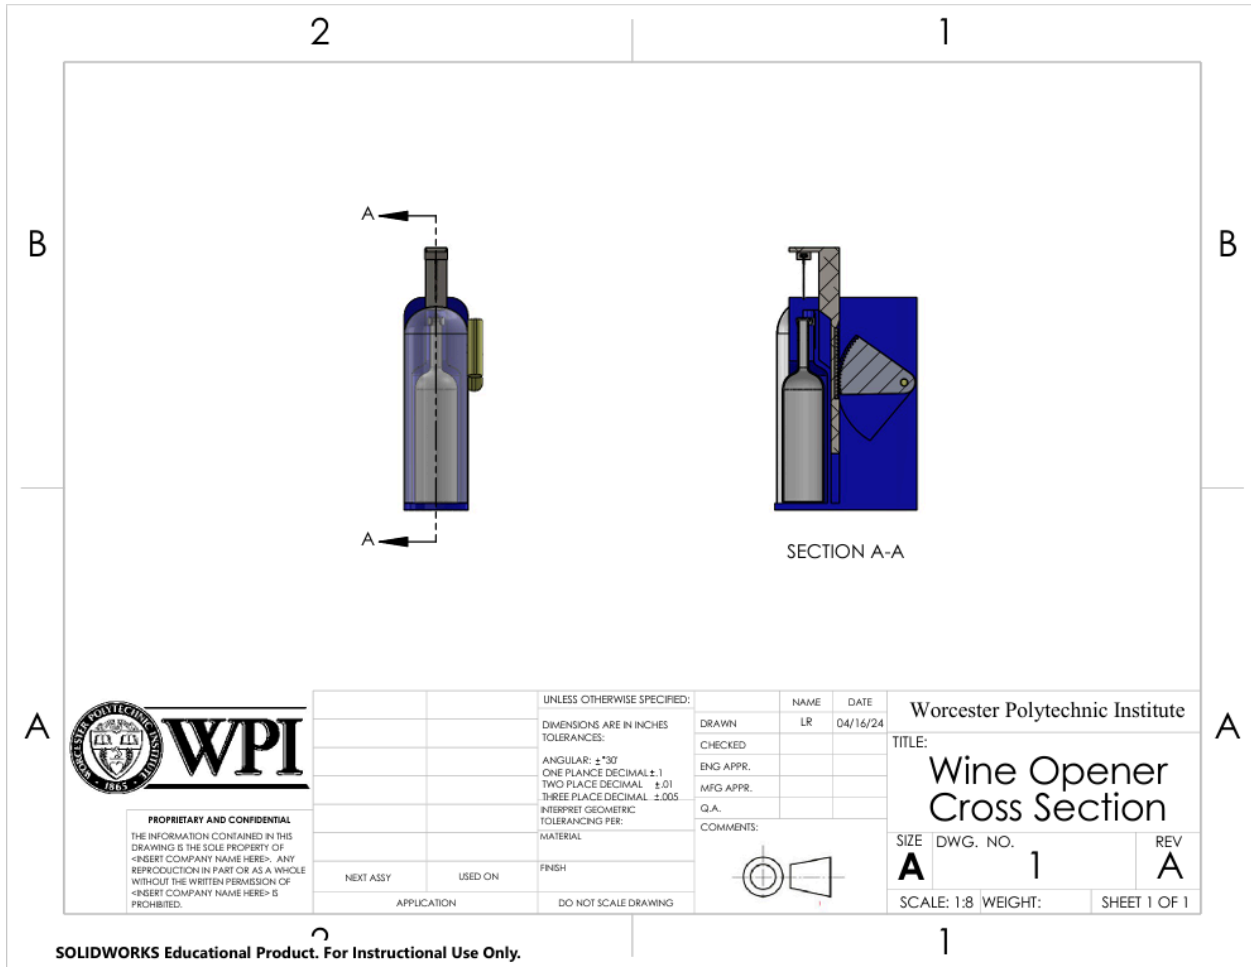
Cross sectional engineering drawing view for an automated wine opener.
